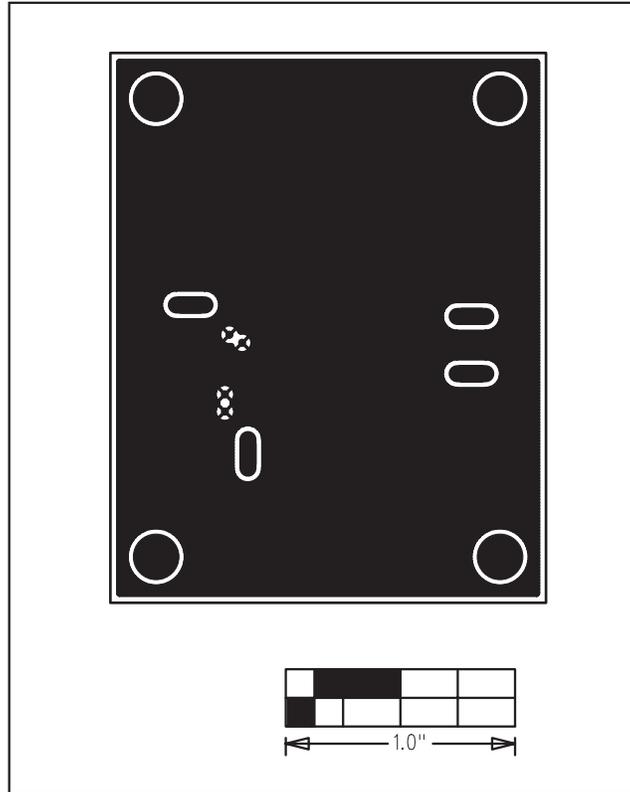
MAX9937 EV Kit PCB Layout—Solder Side
